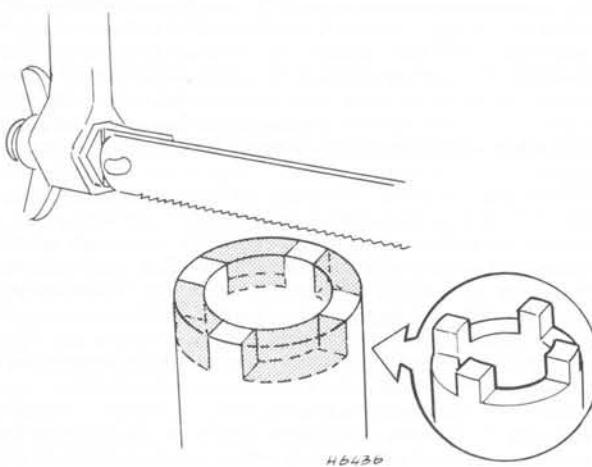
Fabricated tool for releasing the clutch retaining nut
